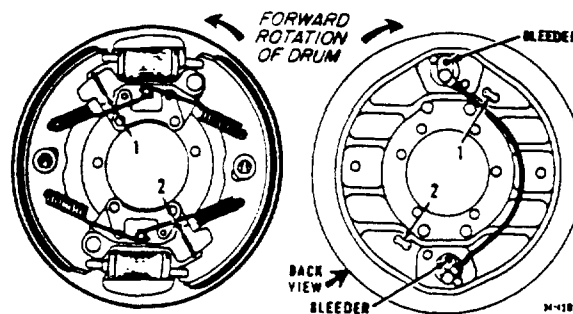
Outboard and Inboard Views of Left Rear "FR2" Brake
